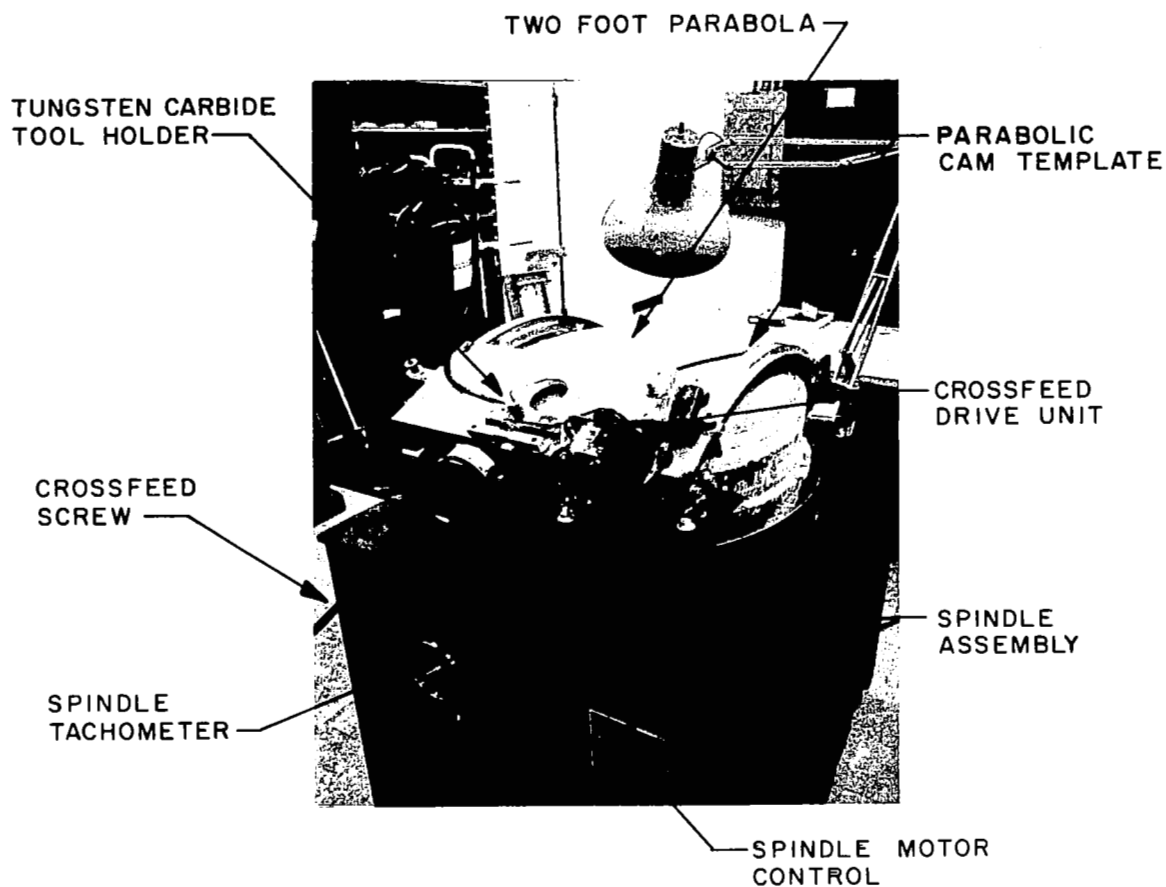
CAM-TEMPLATE MACHINING ASSEMBLY
